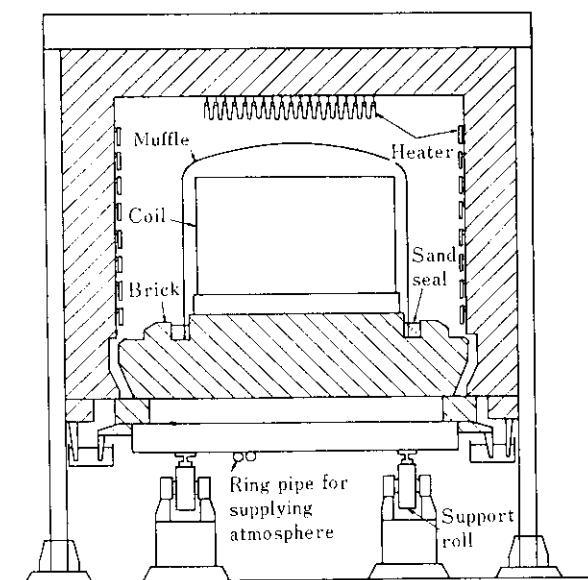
Sectional view of No.2 heating zone of KSR furnace
